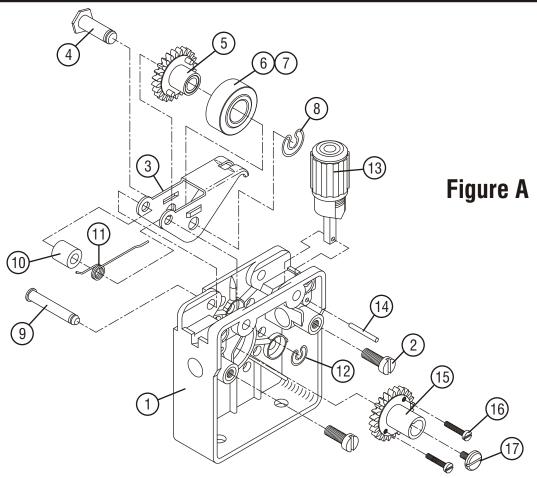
FIGURE A ITEM	PARTS LIST Part No.	PRO <i>II</i> WIRE DRIVE 2 ROLL ASSEMBLY P/N 9004 DESCRIPTION	QTY.
